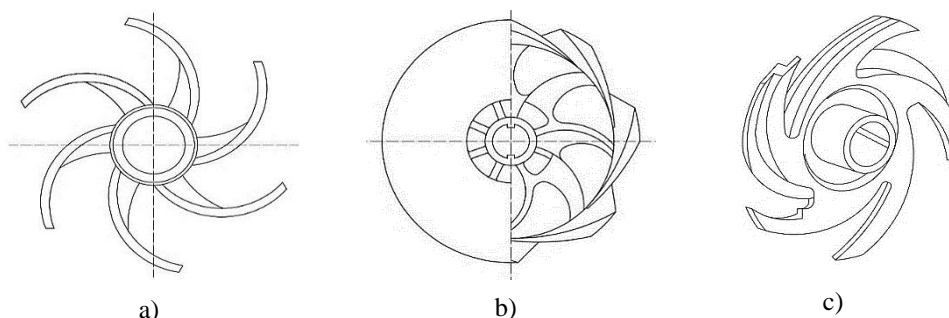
Open impeller designs: (a) the upper and lower impeller discs were completely missing; (b,c) only parts of the upper and lower discs are retained
